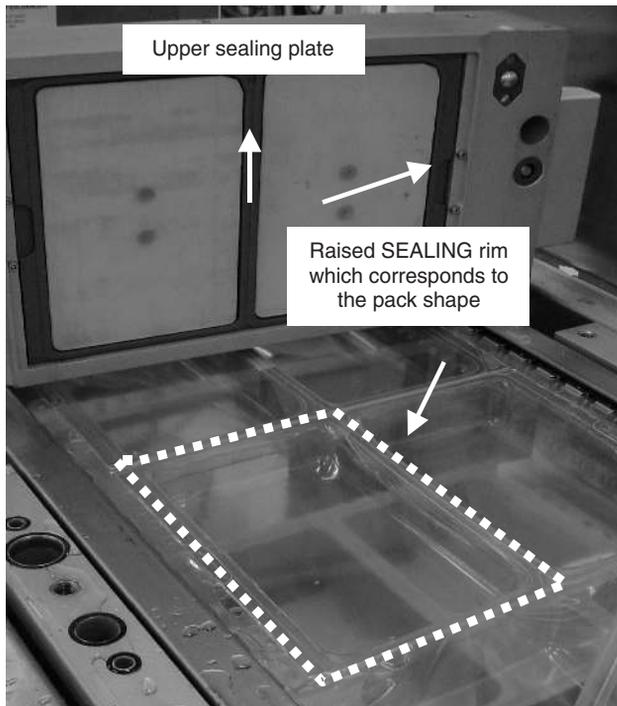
Top web heat sealing on thermoform fill seal machine. (Courtesy of Multivac.)
